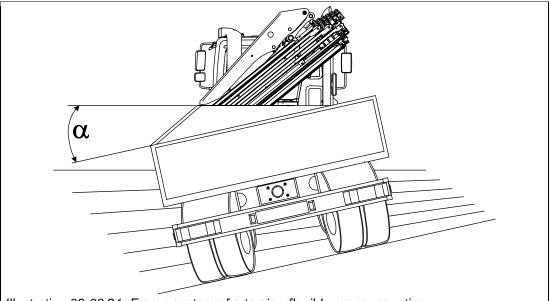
21; Frame system of a torsion-flexible crane mounting
